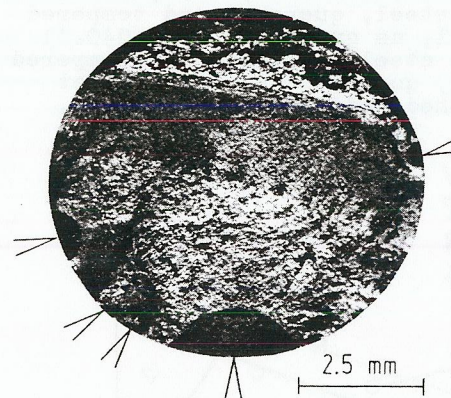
Semi-circular surface cracks marked by heat tinting on a fracture surface.
